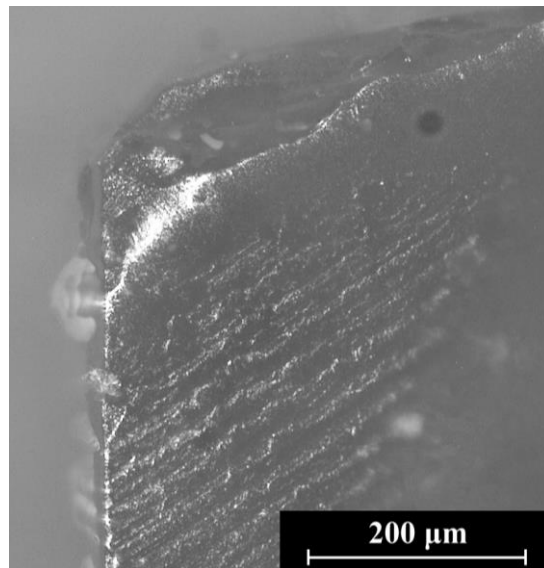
Rake face of the tool after machining experiment 12 on the high heat input samples
